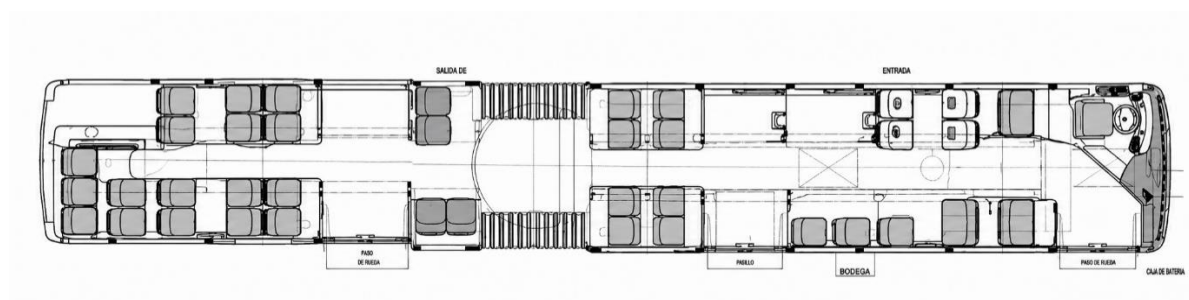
Technical floor plan of Class I Articulated Urban Bus.
